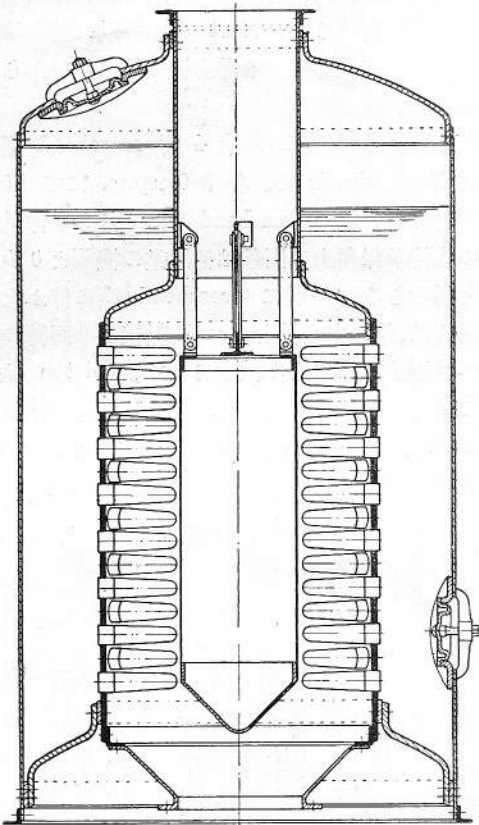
A boiler which is also provided with a spark arrester and has a feed heater and superheater.
